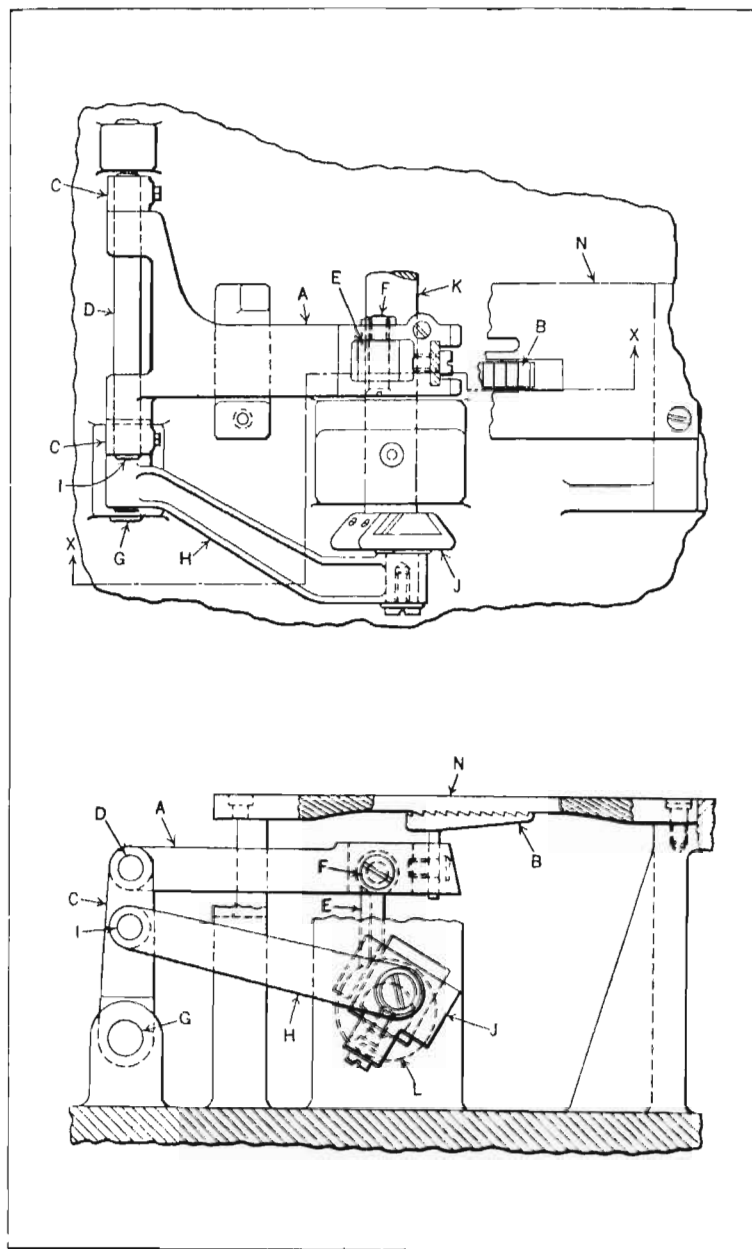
Adjustable-stroke Feeding Mechanism for Sewing Machine
